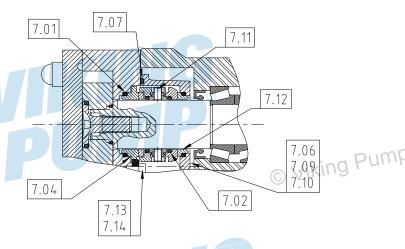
SINGLE FLUSHED MECHANICAL SEAL
